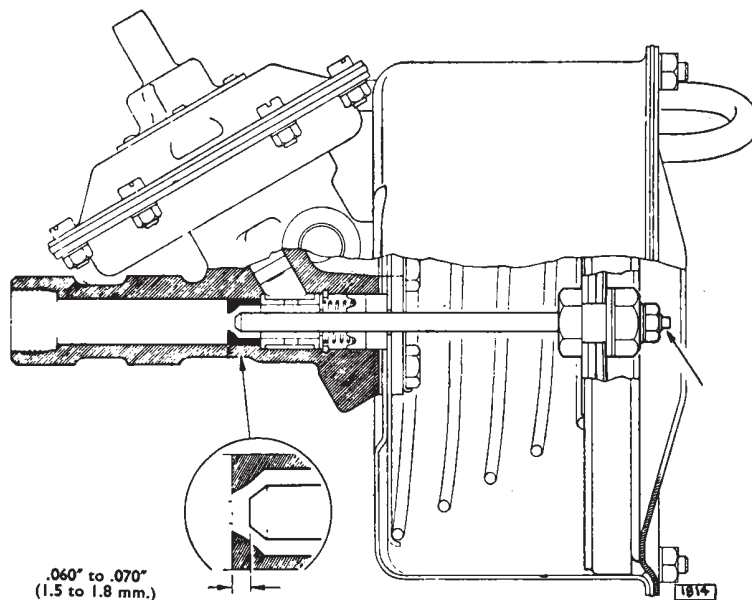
When assembled there must be .060" to .070" (1.5 to 1.8 mm.) clearance between the end of the push rod and the piston. The clearance is adjusted by means of a screwdriver at the point indicated by the arrow.
